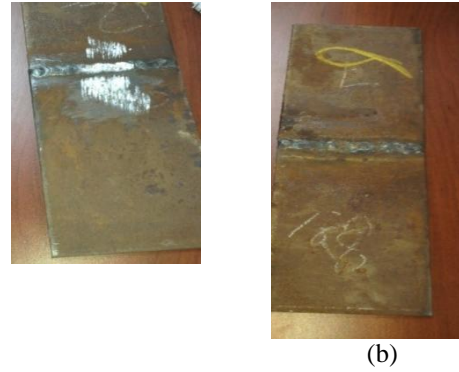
(a) Weld joint by wet electrode, (b) Weld joint by dry electrode.
